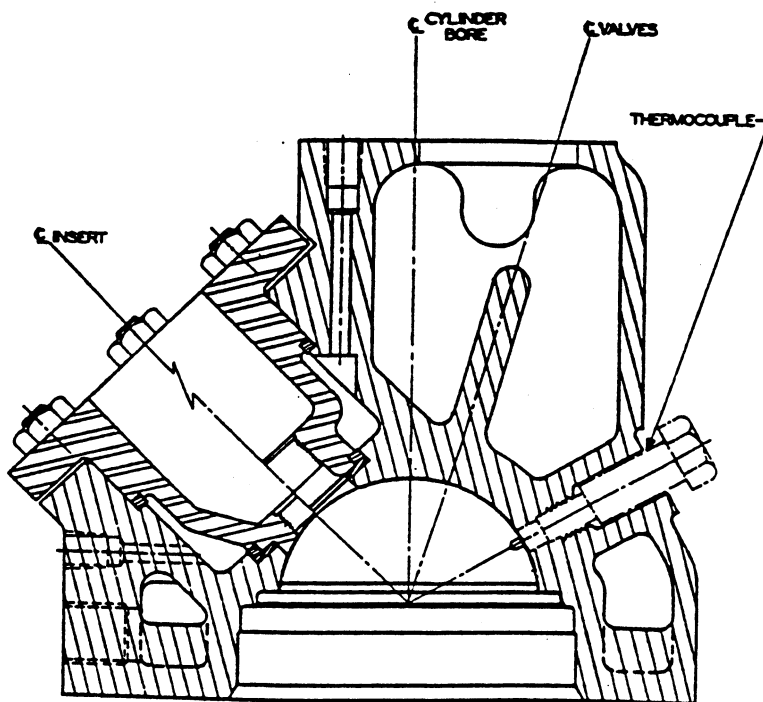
INSERT TYPE HEAD (PART # 16001)
